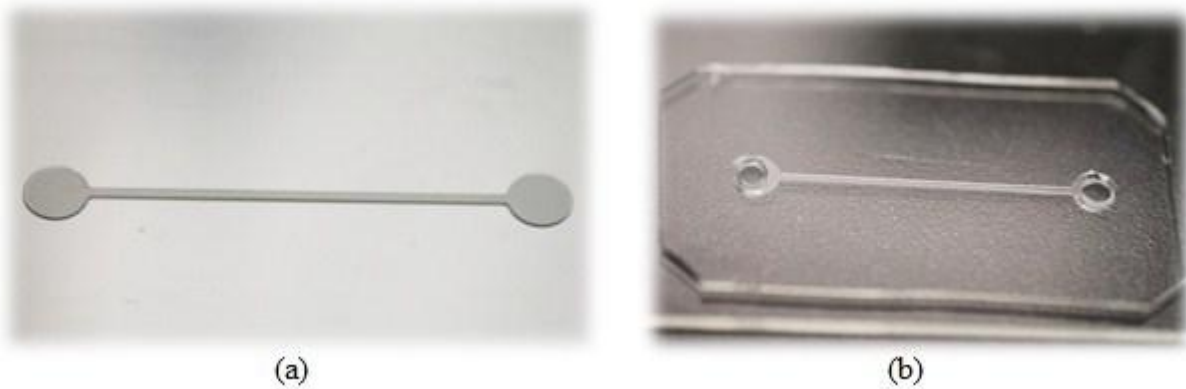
(a) Typical SU-8 mold on Si wafer (b) A thick PDMS fluidic layer
